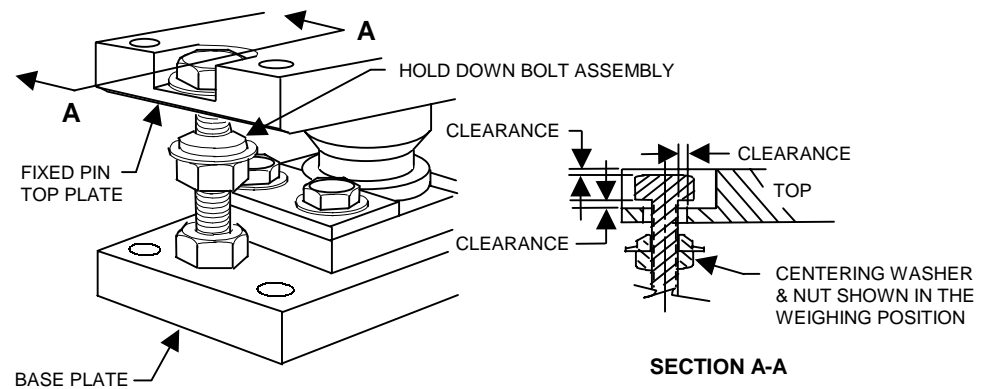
Flexmount HD Hold-Down Bolt Assembly
